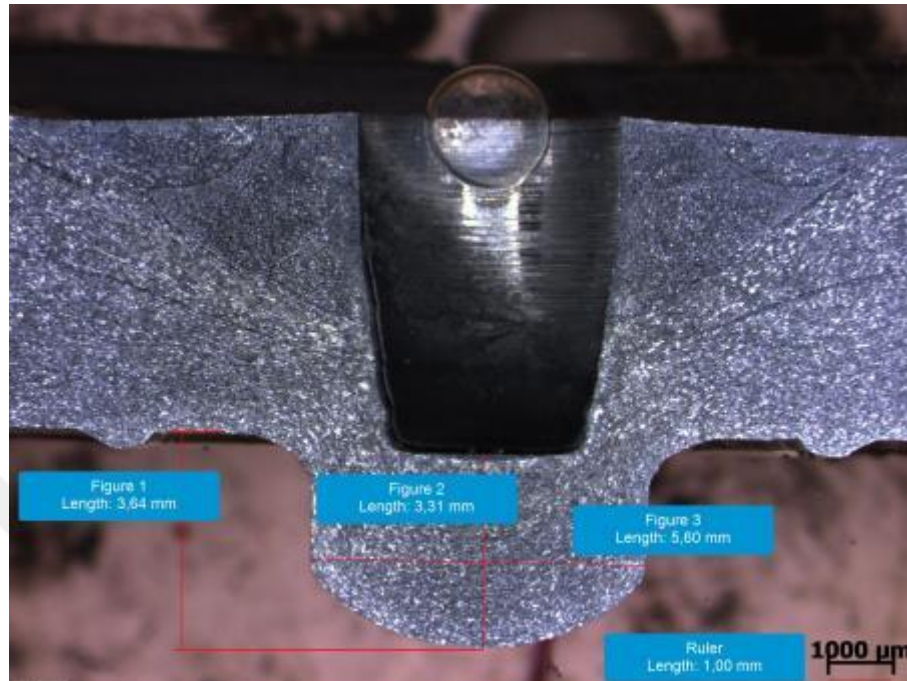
Illustration of measured parameters of welded sample and macrostructure view – 4mm plunge depth
